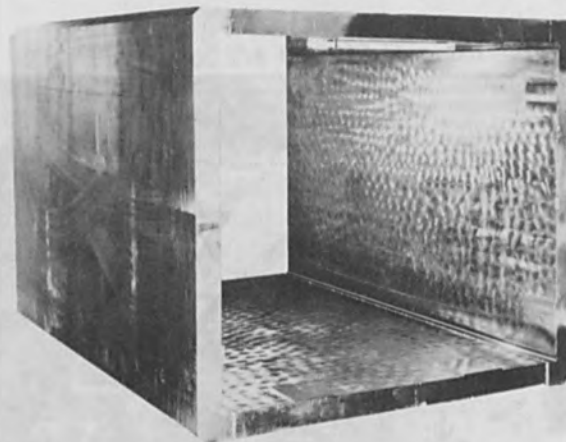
Preparation of the assembly for welding Osiris vessel
